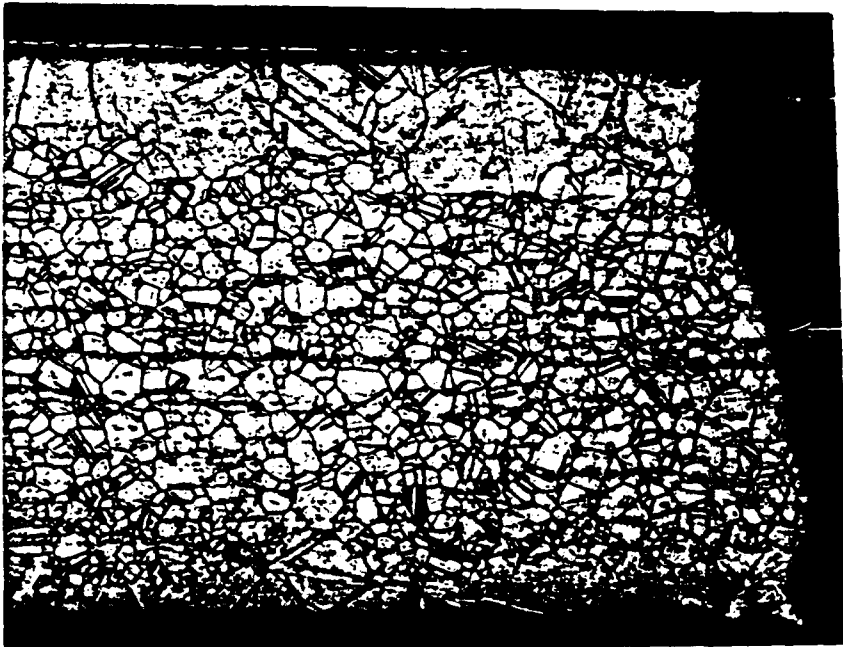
Metallographic cross section of a failed AMI 915-HT brazed cantilever bending HCF specimen. The arrow indicates the fracture surface. Grain size is ASTM No. 5.5 on the interior and 2.5 on the exterior surfaces. This can be compared to the AMS 4777 brazed specimen which had an ASTM 6.0 grain size throughout (Figure 28). Mt. No. 91-672, Mag: 64X, Etchant: Electrolytic, 10% Oxalic Acid
